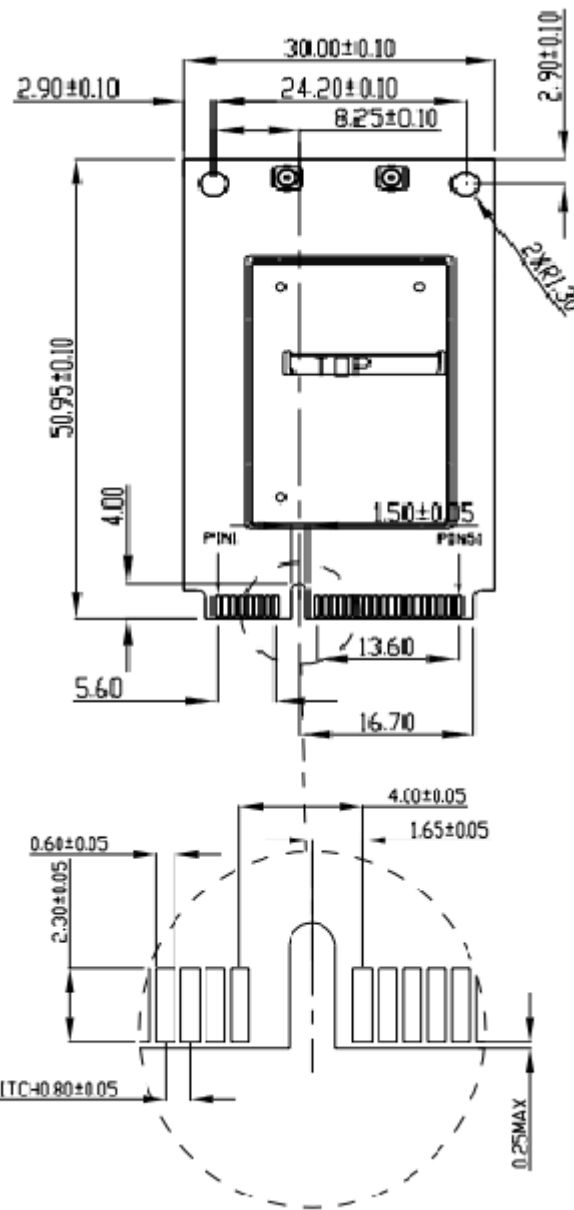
Dimensions of SIM5350-PCIE (Unit: mm Top view)
